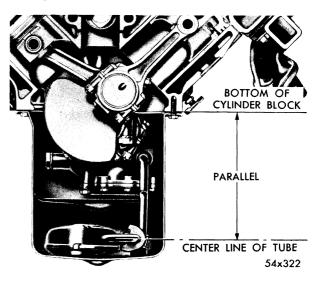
Oil Strainer and Suction Tube Alignment (Typical)
